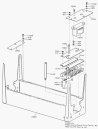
CROSS SECTIONAL MECHANICAL ASSEMBLY
